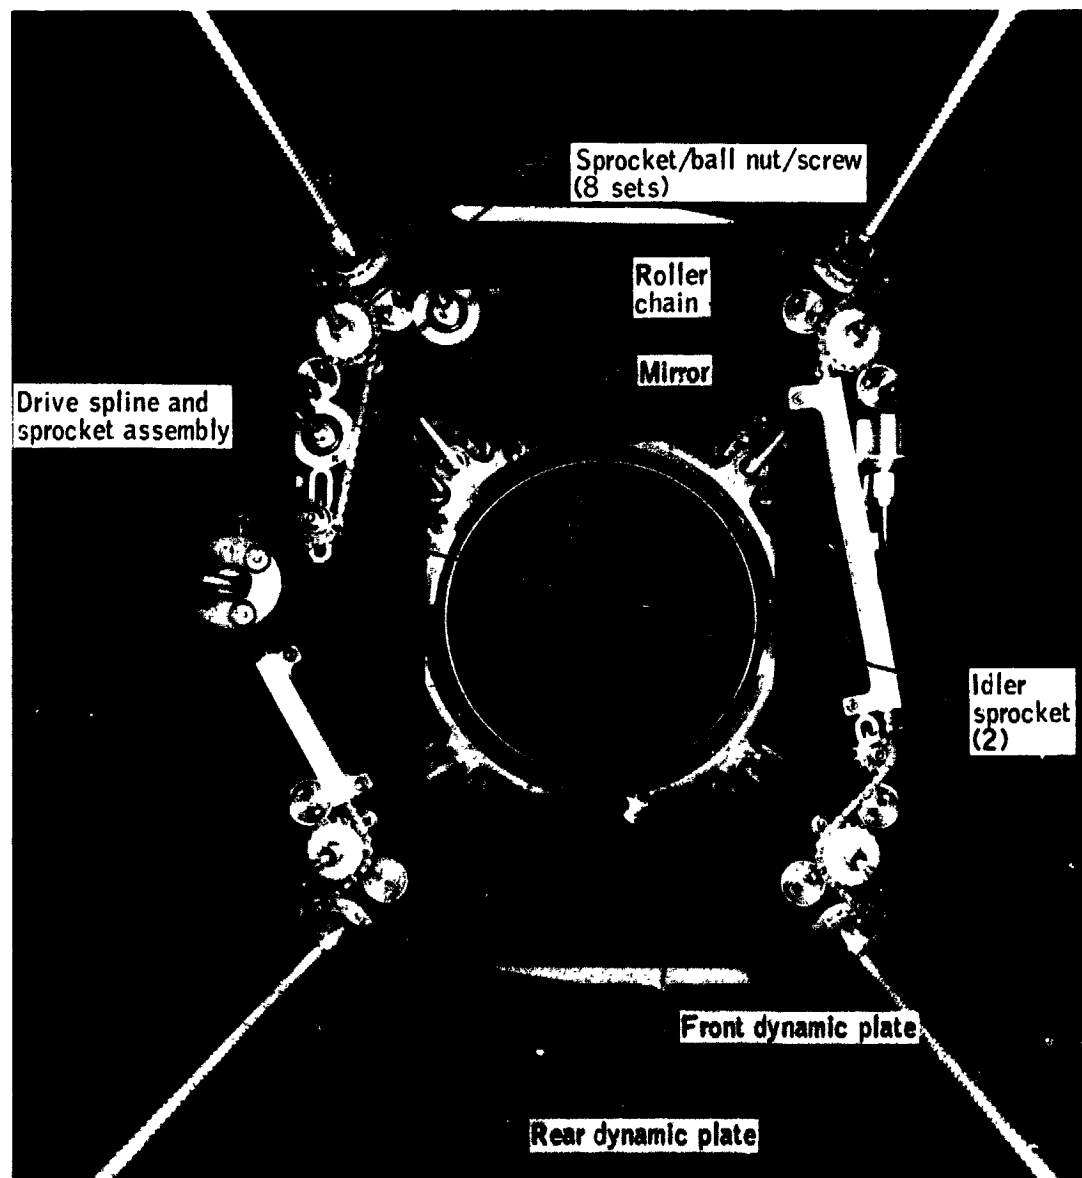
S019 Articulated mirror assembly extend/retract mechanism.
